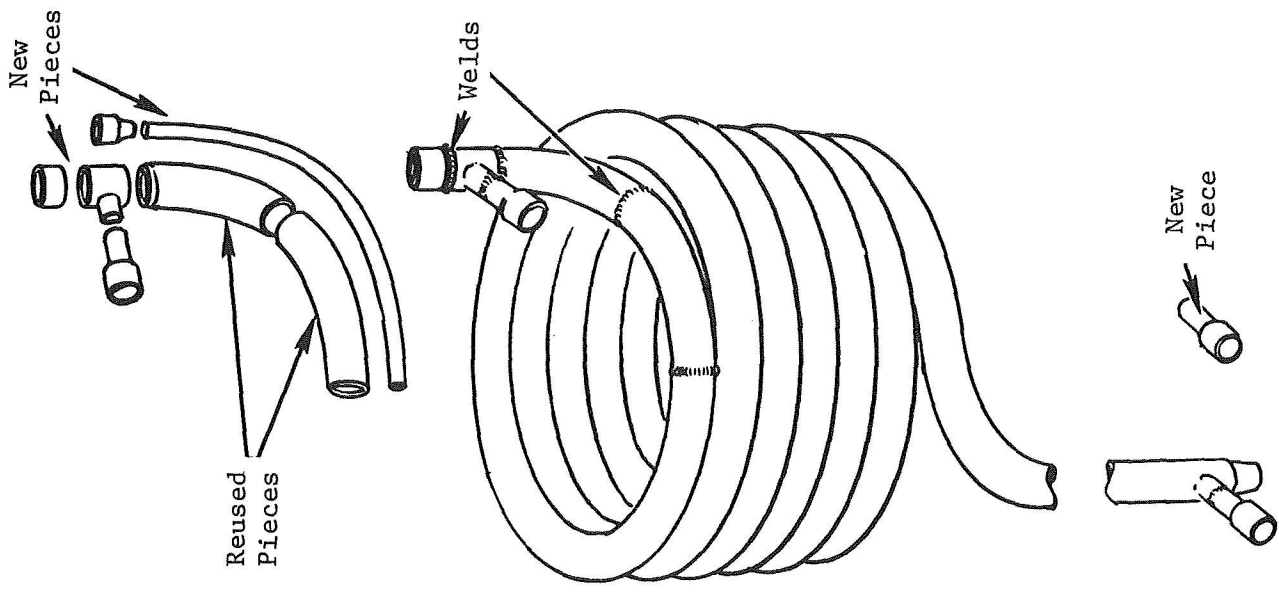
Top of T-1111 Corrosion Loop Boiler Following Final Repair Welding. (Orig. P68-9-31B)
